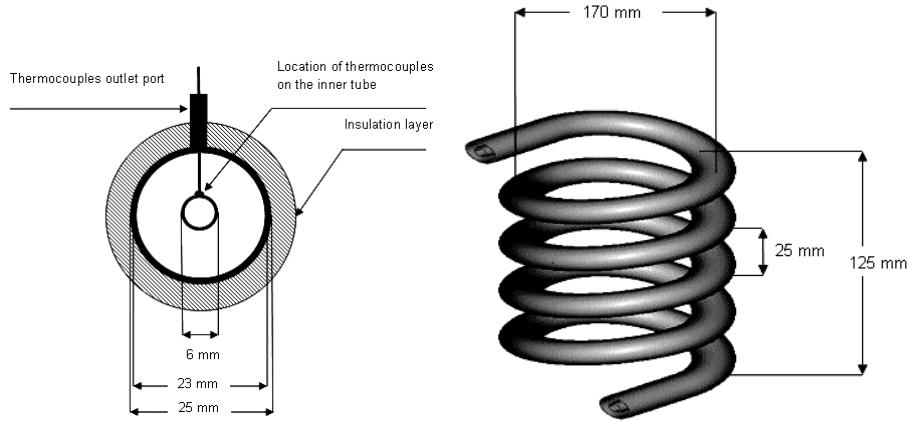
Physical dimensions of tube in tube helical heat exchanger.
